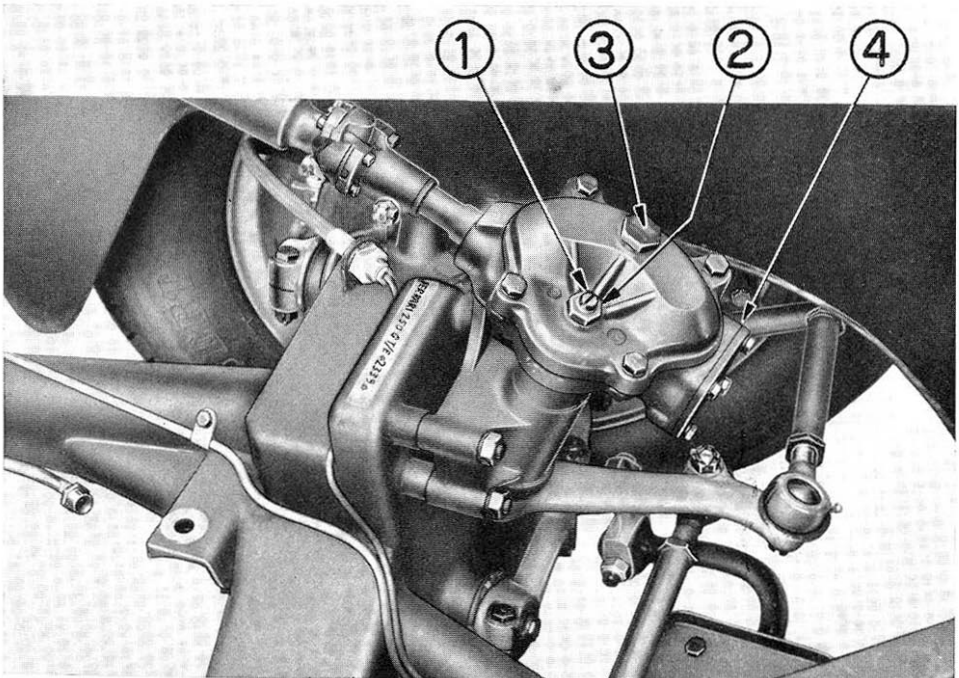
Steering box : 1) register screw ; 2) lock nut ; 3) Oil cap ; 4) Bearings adjustment lining.
